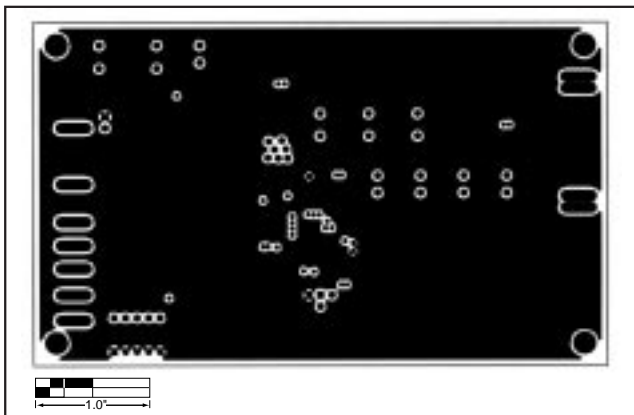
MAX1624 EV Kit PC Board Layout—Internal GND Plane (layer 2)
